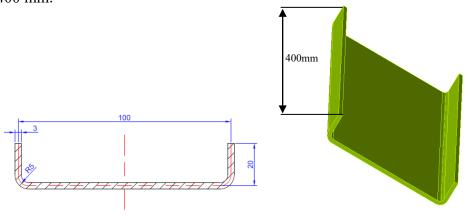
Sectional geometry (U section) and extruded profile of the real cargo floor strut.
